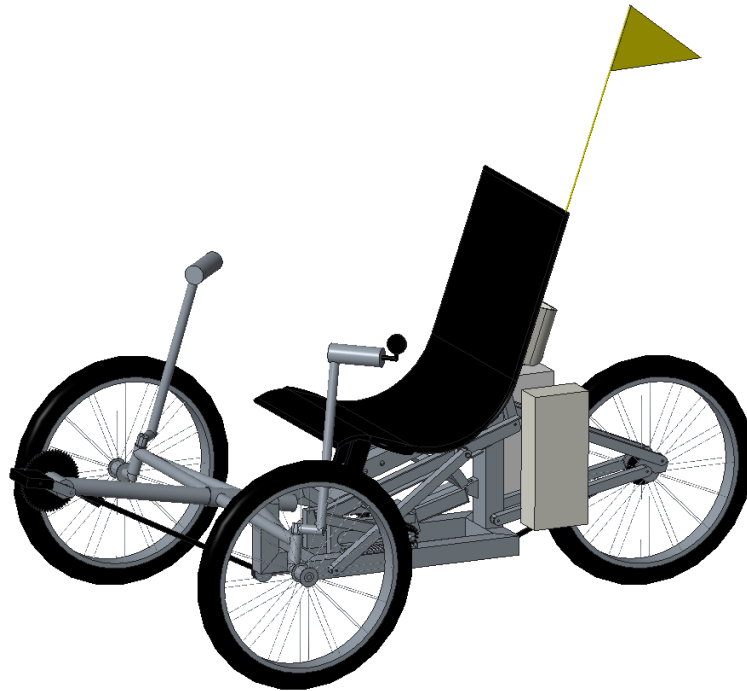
A Front Isometric View of the Redesigned CAD Model.
